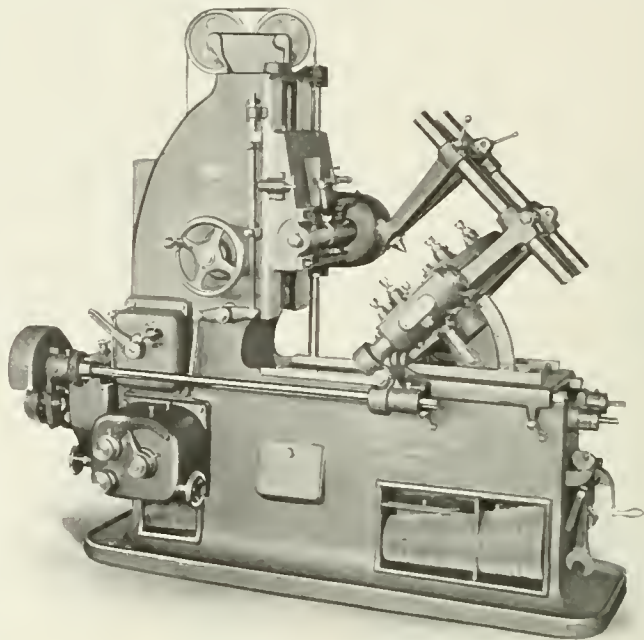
Gould & Eberhardt Machine set for Bevel Gear Work
